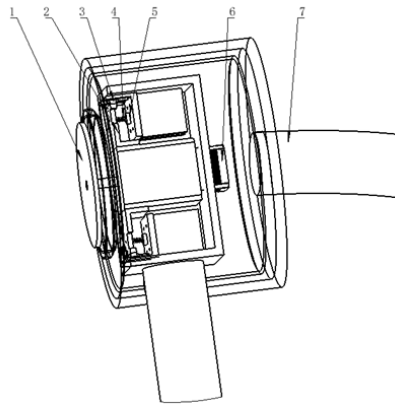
Dust-collecting grinding head: 1- Grinding disc; 2- Connecting plate; 3- Slider; 4- Spring; 5- Sensor; 6- Stepper motor; 7- Dust suction tube.
